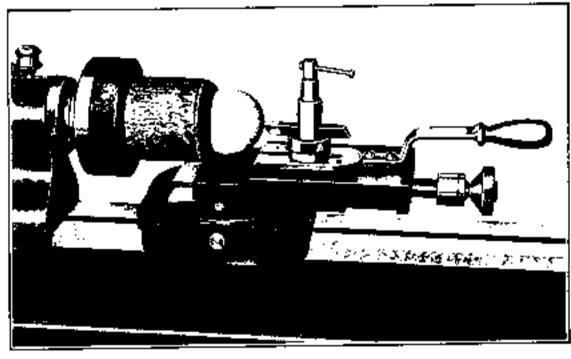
Rivett Ball Turning Rest arranged for finish turning ivory billiard ball held in chalked wood chuck
